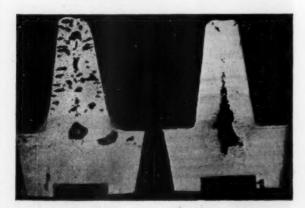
Two cut specimens of type C weighing about 15 lb. The left section shows penetration caused by internal gas pressure.
